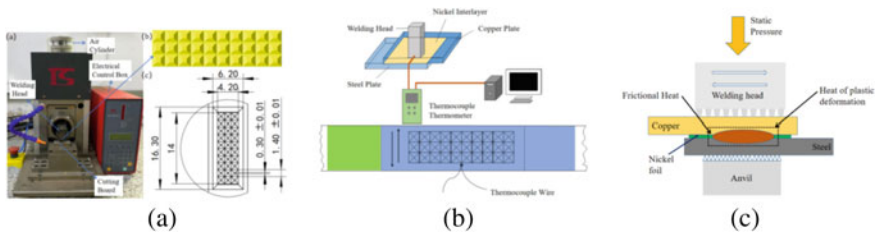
The diagram of experimental equipment a The ultrasonic metal welding machine and detailed knurl pattern of sonotrode (top) and its dimension (bottom), b Thermocouple thermometer and temperature measuring position, c Schematic diagram of welding assembly
